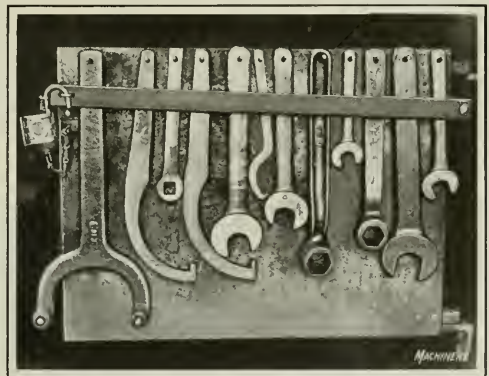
Method of locking Wrenches to a Machine to prevent them from being lost or removed by Unauthorized Workmen
